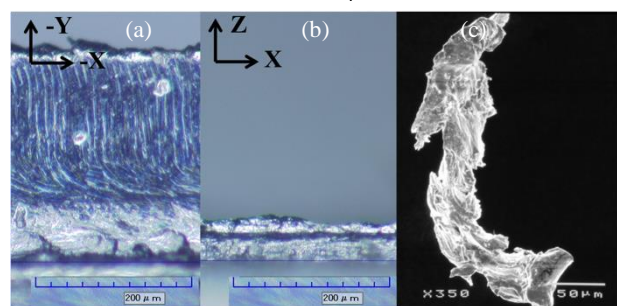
bottom (a) and side (b) view of machined surface and chip (c) on  $rd$  500 $\mu\text{m}$
